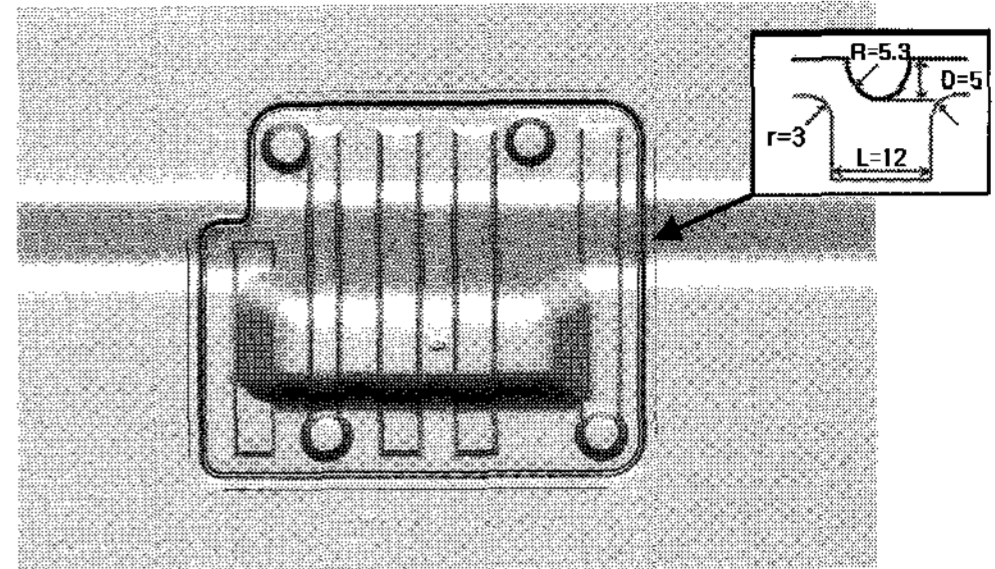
Draw-beads on the die surface of the heat protector panel with modified surface shape
